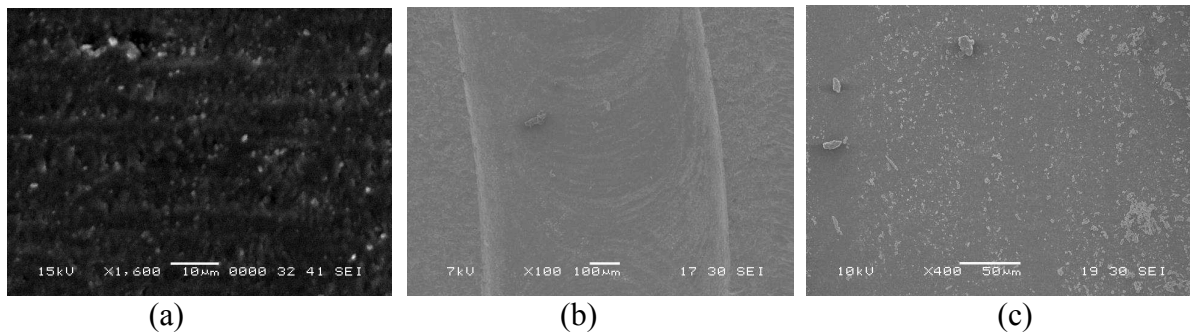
SEM of machined surfaces using (a) 2 mm, (b) 1 mm, (c) 0.5 mm diameter tool.
